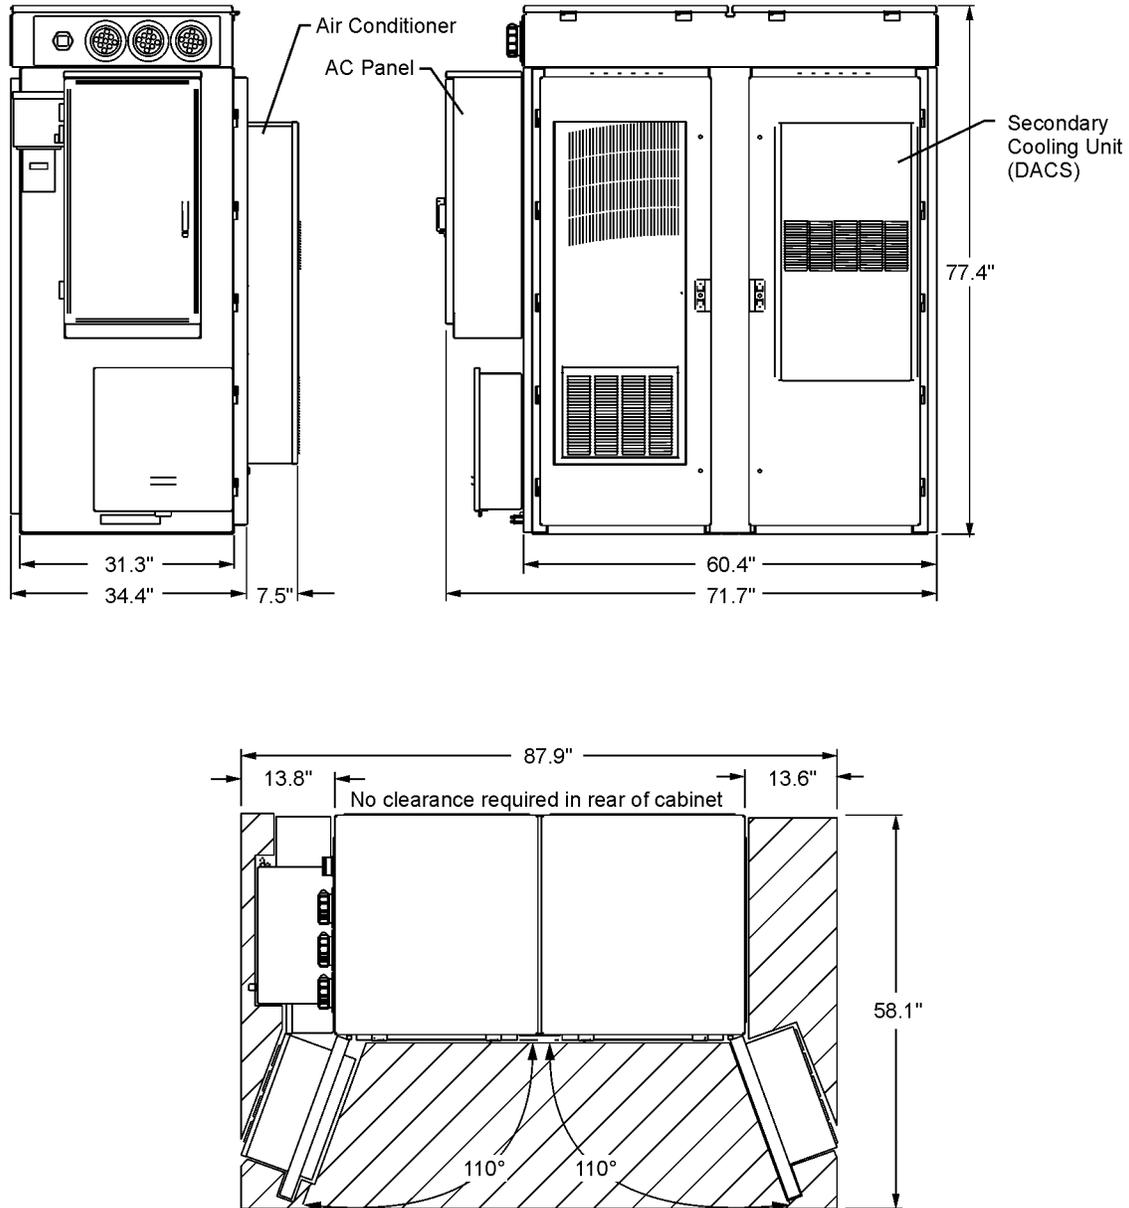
G2 Cabinet Dimensions and Required Clearances
